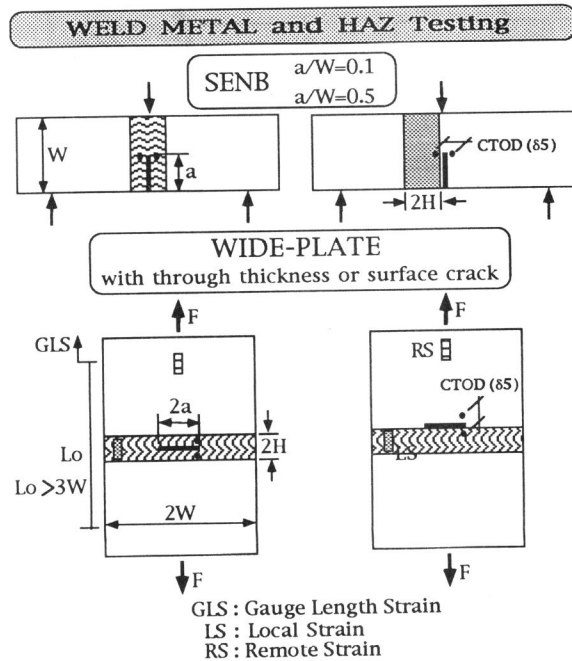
Schematic illustrating two basic specimen configurations for testing of welds including some of the quantities to be used in the fracture analysis.
